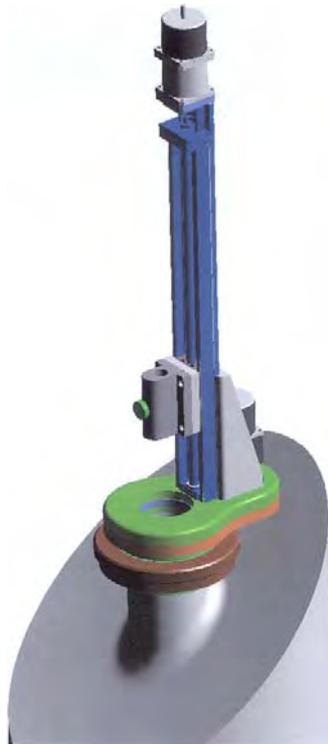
Laboratory scanner for inspection from inside the nozzle.
